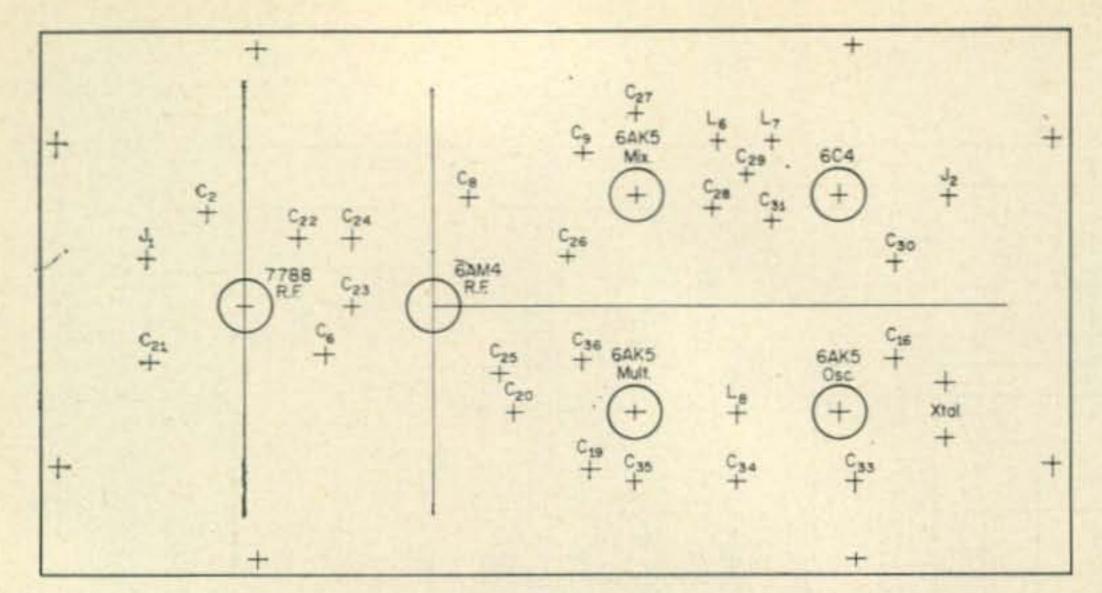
Layout of the components is shown in the bottom view above. The board is a 1/16" thick double clad copper made G.E., Taylor Fibre, etc. and is sold by Allied Radio and others. The dimensions are 5 x 9½ x 2".
